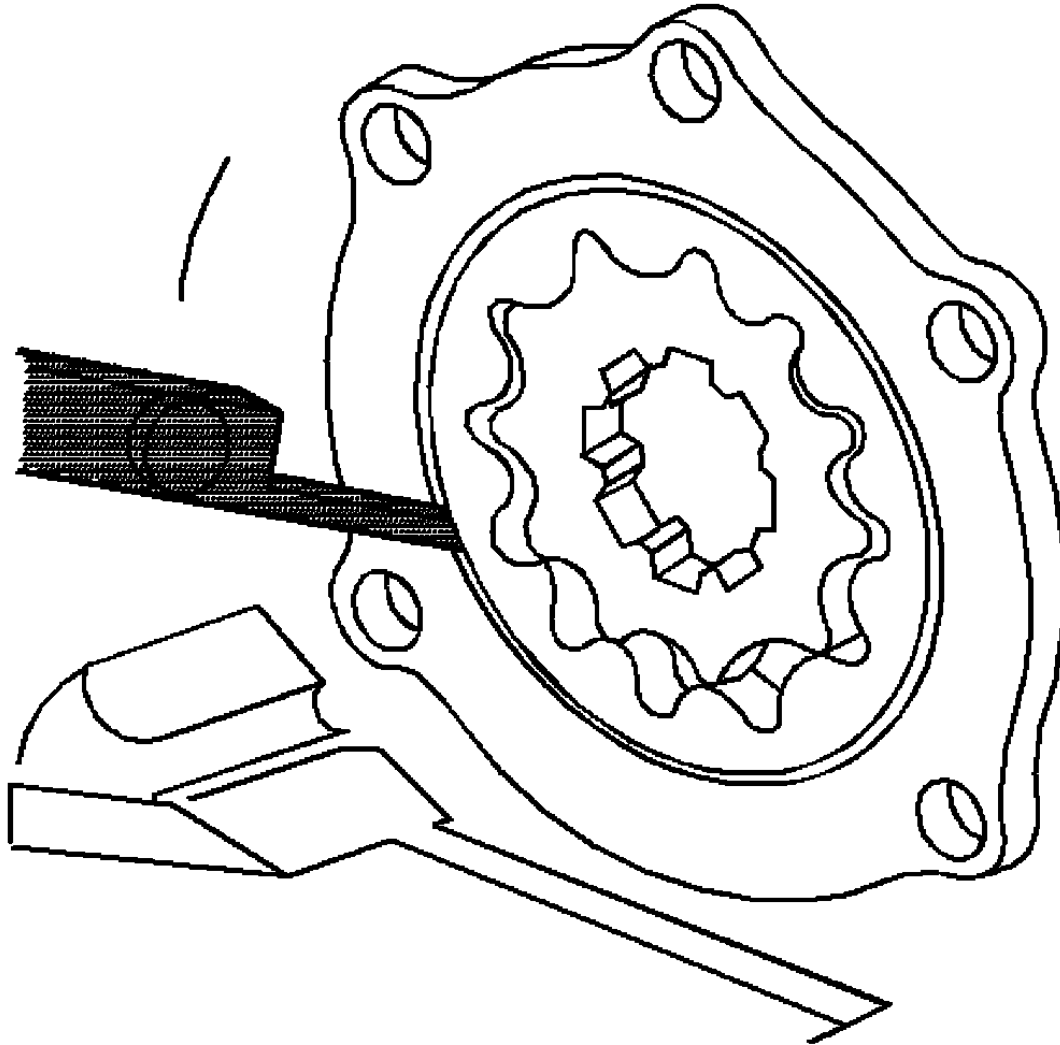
Measuring Outer Oil Pump Gear Tip Clearance
